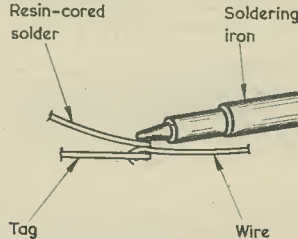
The making of solder joints is hastened by applying the iron to the solder as shown here
